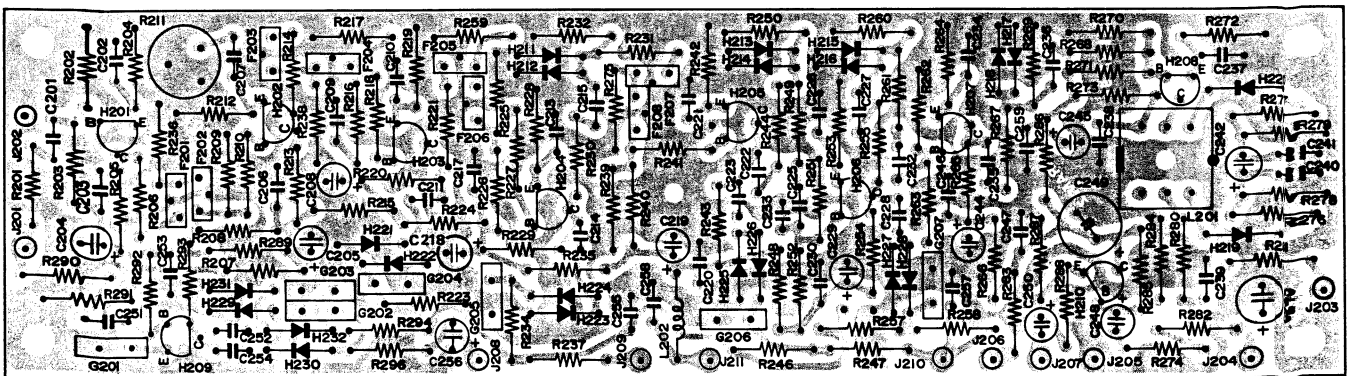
FM IF Amplifier Assembly P200 Component Locations
